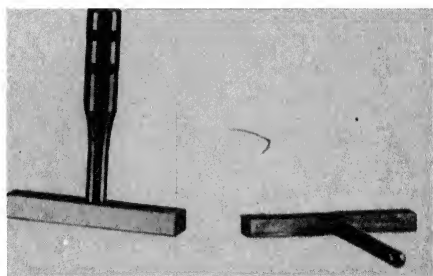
APERTURE GAUGE FOR STANDARD CHAMBER.
